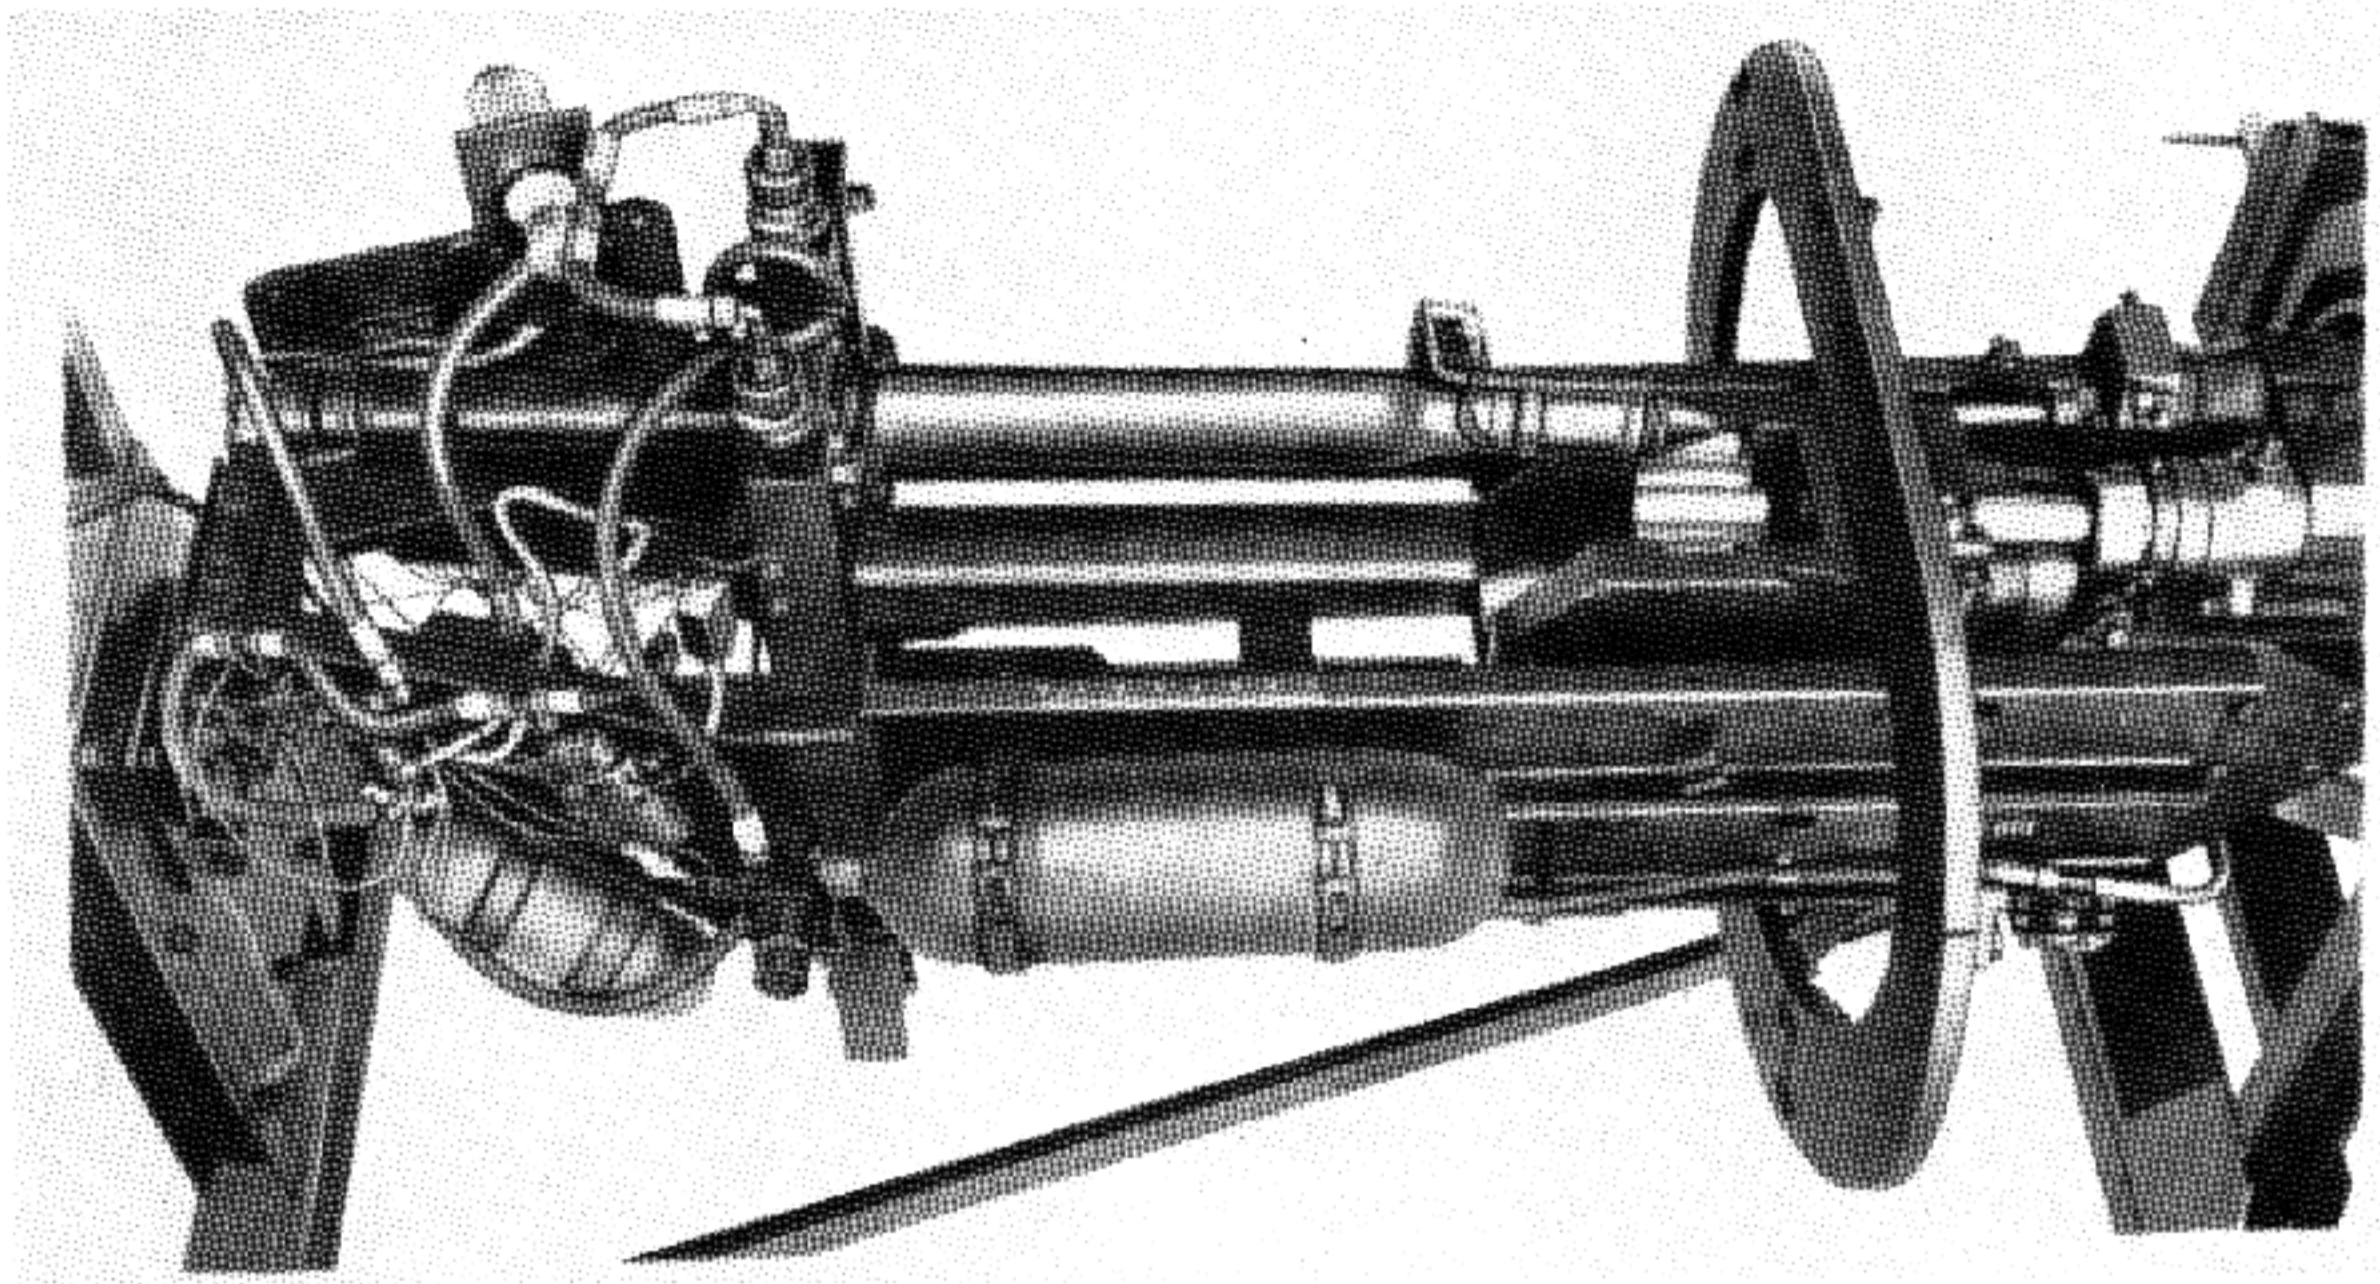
Receiver of 5-cm BK Automatic Aircraft Gun, with cover removed. A round is about to descend for ramming.
